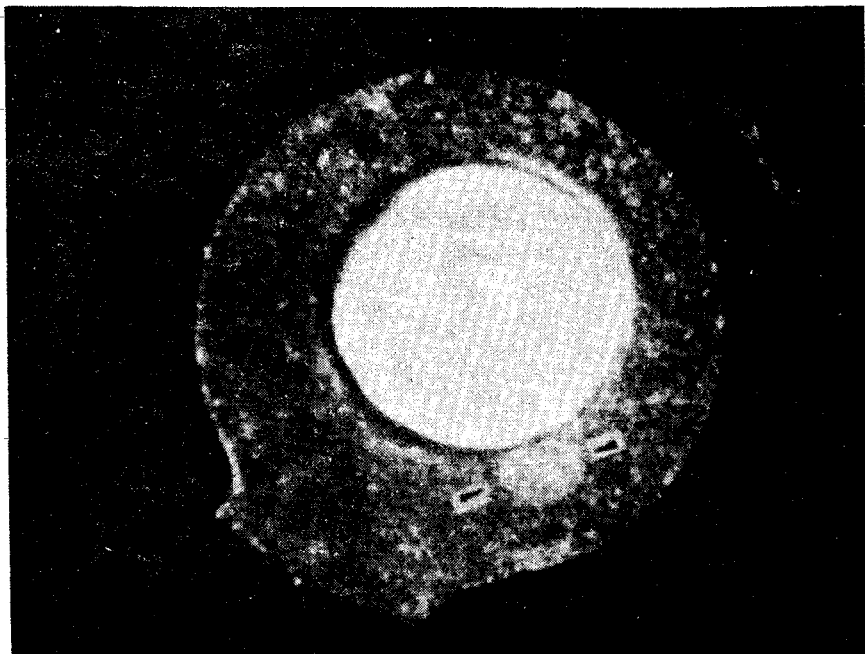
PLATED-THROUGH HOLE NORMAL VIEW UNDER STEREO MICROSCOPE WITHOUT OIL AND VIEW OF LAND AFTER TESTING WITH SOLDERING IRON
